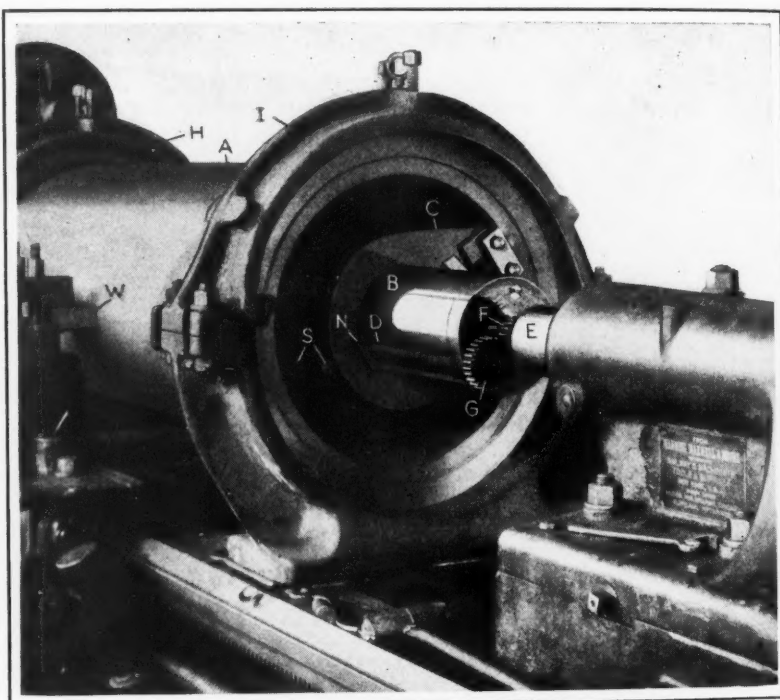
Geared-head Lathe Equipped for Taper-boring Large Cast-iron Cylinders
